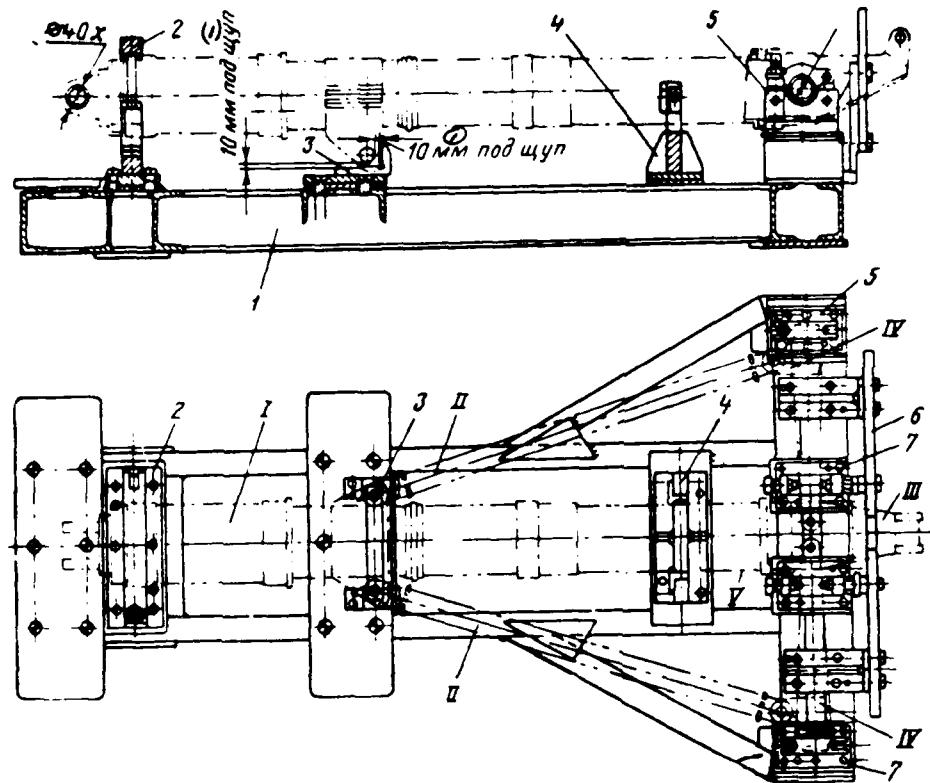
Device for assembly of nose wheel strut of landing gear:
